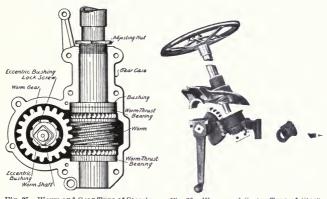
Worm-and-Gear Type of Steering Gear. Peerless Motor Car Company, Cleveland, Obio.
